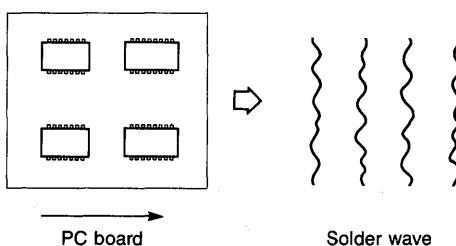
Orientation of Components on PC Board Before Wave Soldering
